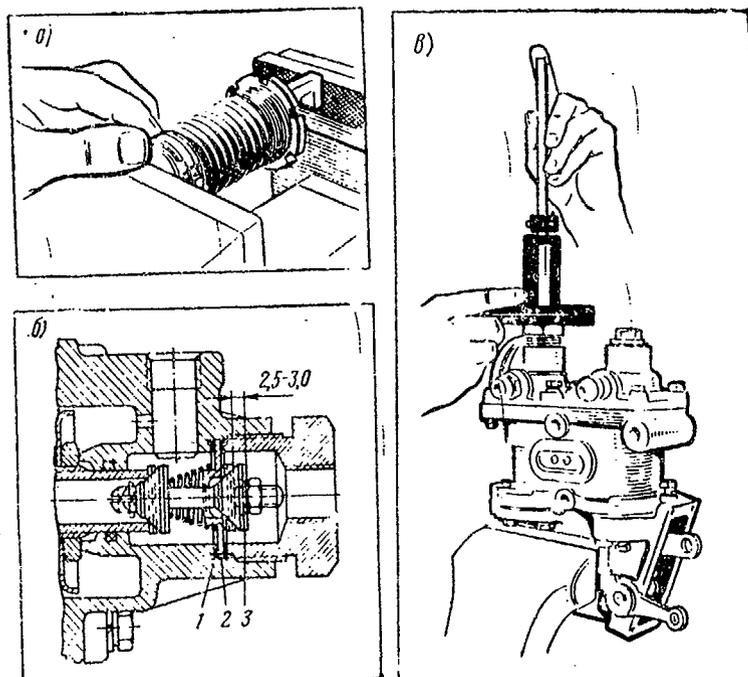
Shaft of Trailer Valve Section: a, disassembly of shaft; b, working travel of intake valve; c, measurement of working travel of intake valve: 1, adjusting shims; 2, intake valve seat; 3, intake valve
